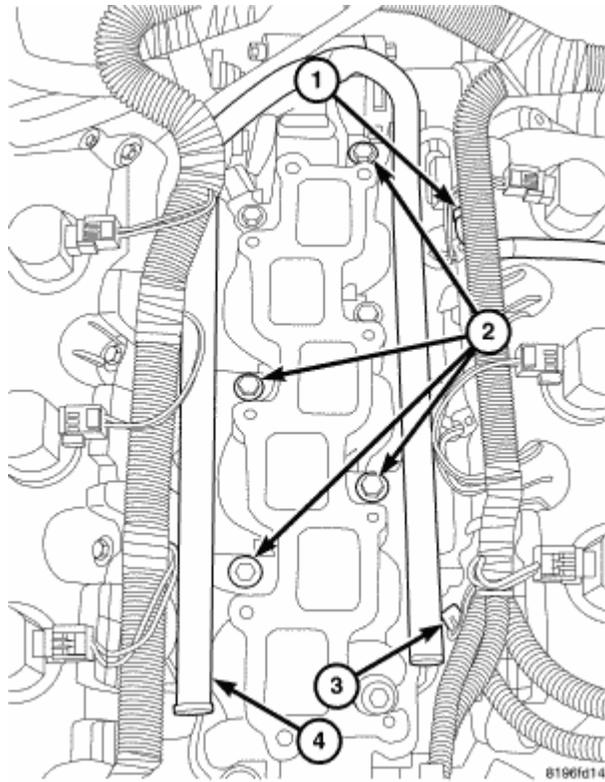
Identifying Fuel Line, Mounting Bolts, Electrical Connectors & Fuel Rail
